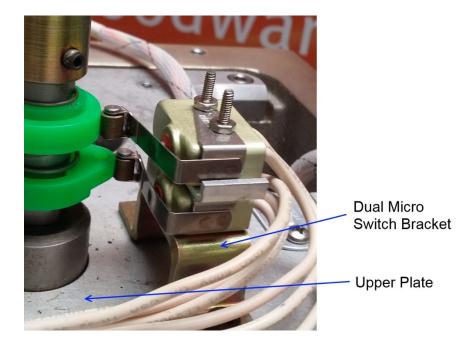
Install the Indicator Shaft Together with Camshaft Assembly
